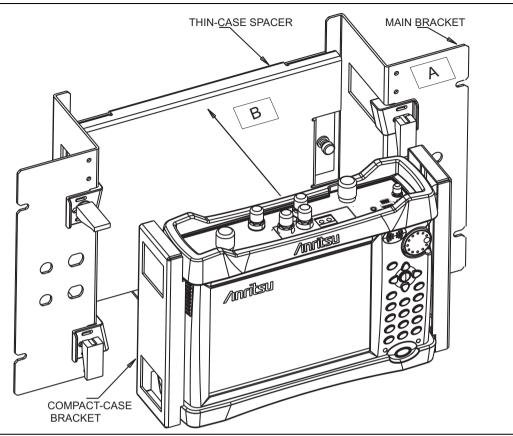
Compact-Case Rack Mount — Mounting the Instrument
